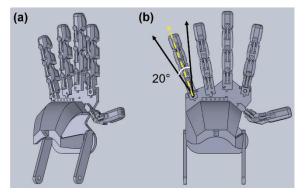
CAD design of (a) palm socket, and (b) lateral movement of fingers
